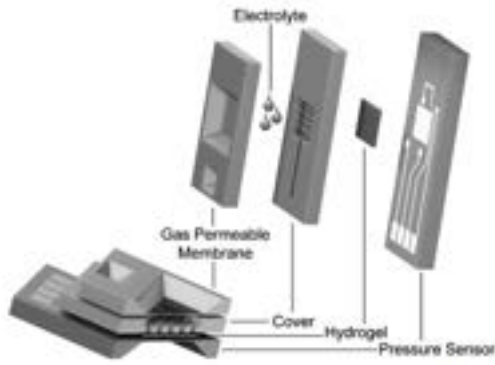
Cross-section and exploded view of the hydrogel-based CO₂ sensor.
